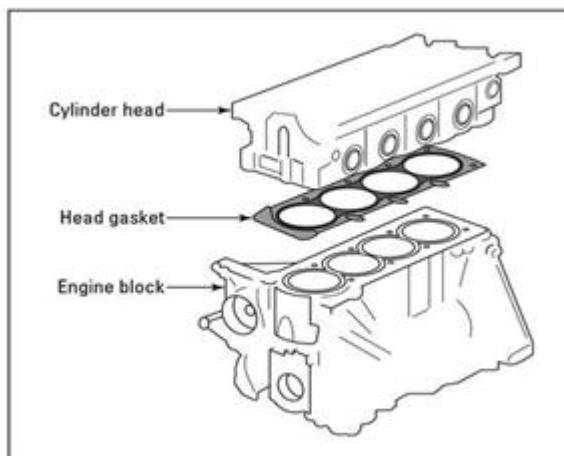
Assembly of Cylinder, Cylinder Head and Gasket
